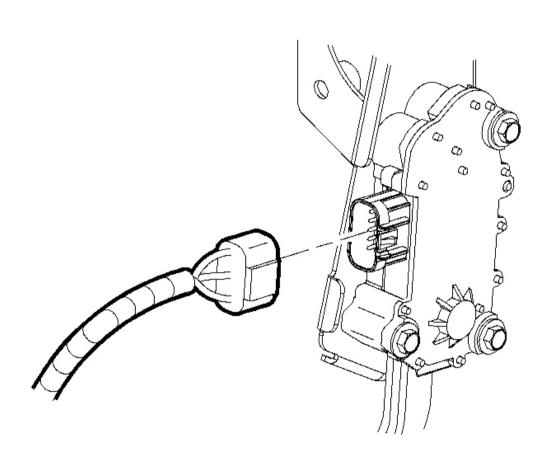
View Of Accelerator Pedal Position (APP) Sensor Courtesy of GENERAL MOTORS CORP.
